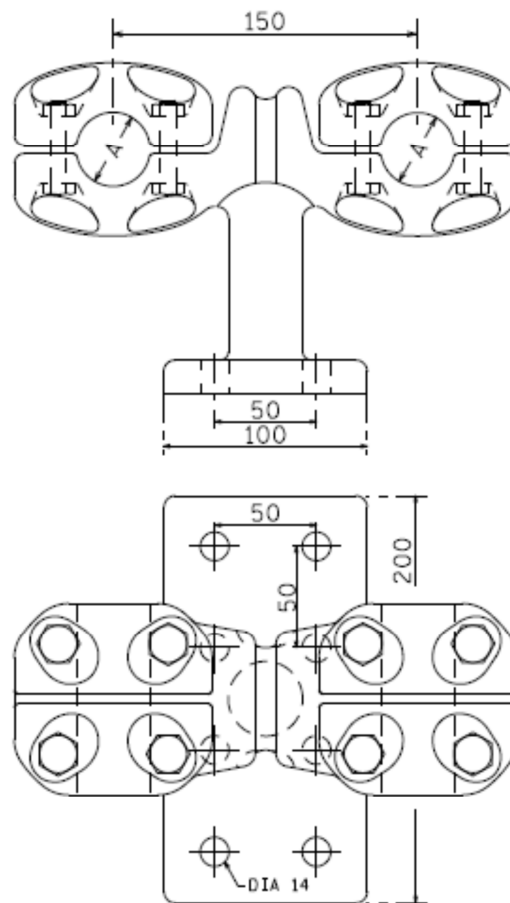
EPTT2: Twin conductor bolted support clamp on eight hole pad to fit 8 hole terminal
